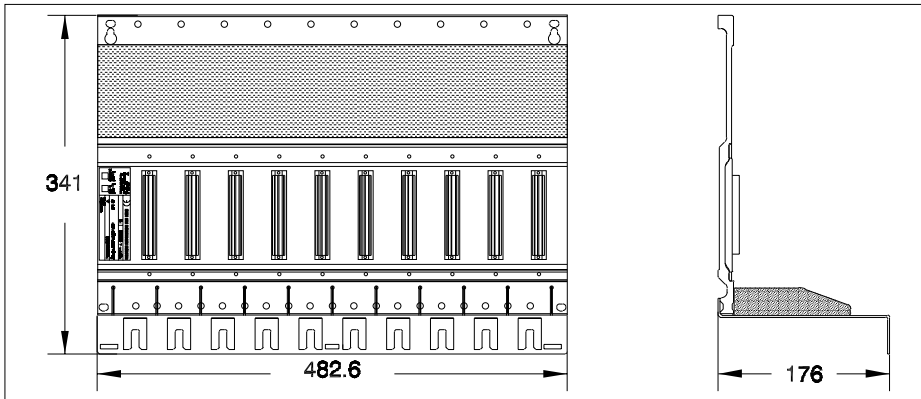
Dimensions of DRA 01 and DRA 02 racks in mm
